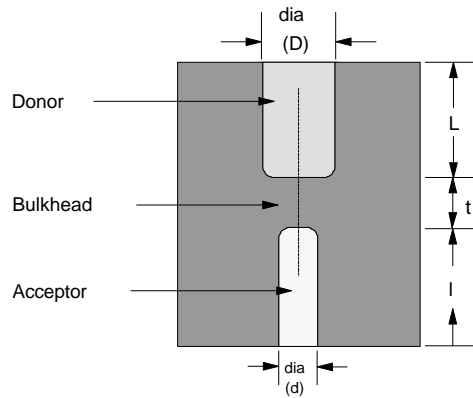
Typical Explosive Configuration of a Through-Bulkhead Initiator
